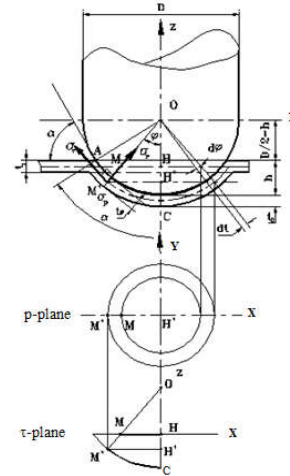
Absolute deformation of sheet workpiece in 3 perpendicular directions
